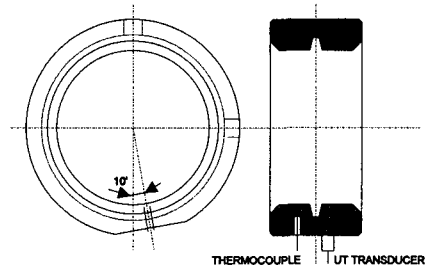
Journal bearing setting with UT transducer and thermocouple
